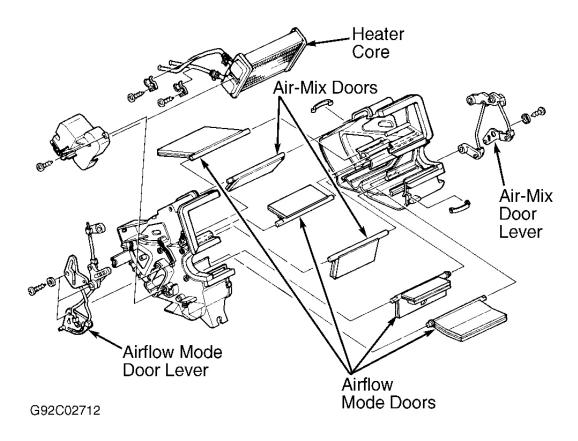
Exploded View of Heater Case Courtesy of MAZDA MOTORS CORP.
